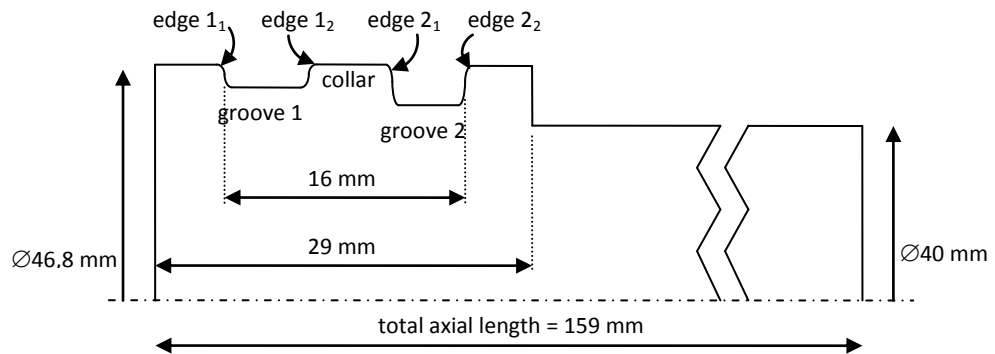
Nomenclature and common dimensions for the DoE samples.
